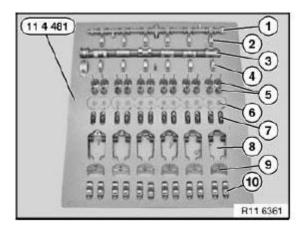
Identifying Components And Special Tool (11 4 481) Courtesy of BMW OF NORTH AMERICA, INC.
